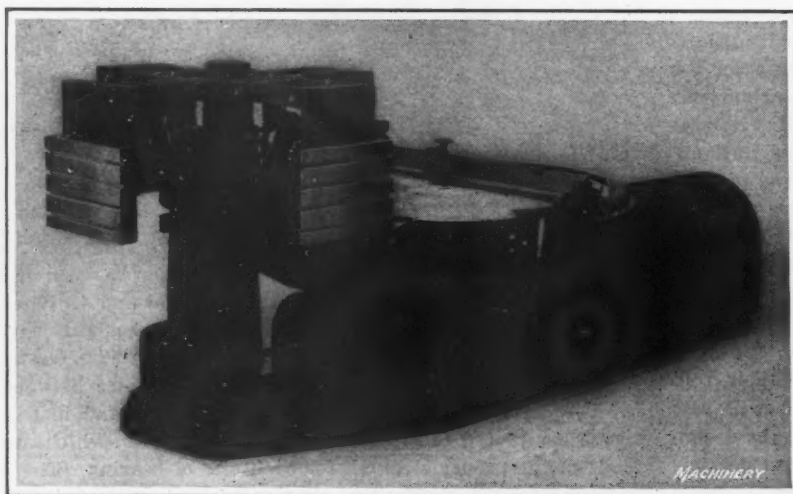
Front View of Gardner No. 24 Continuous-feed Disk Grinder
